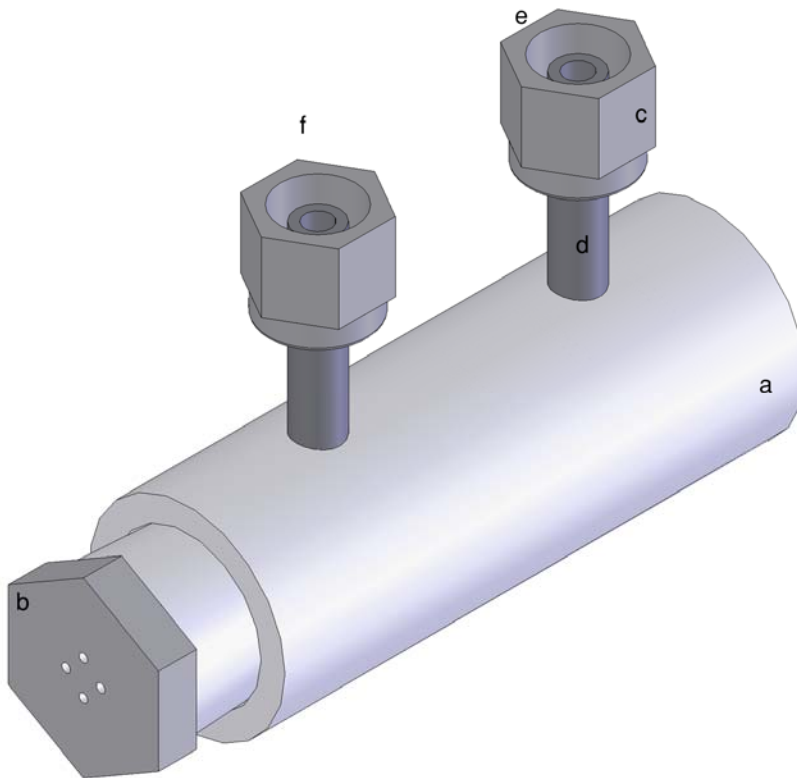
Isometric view of CAD drawing of fitting shown in Figure 7-4. See Figure 7-4 for label key. Note that wires passing through hex plug (b) have been omitted from this schematic.
